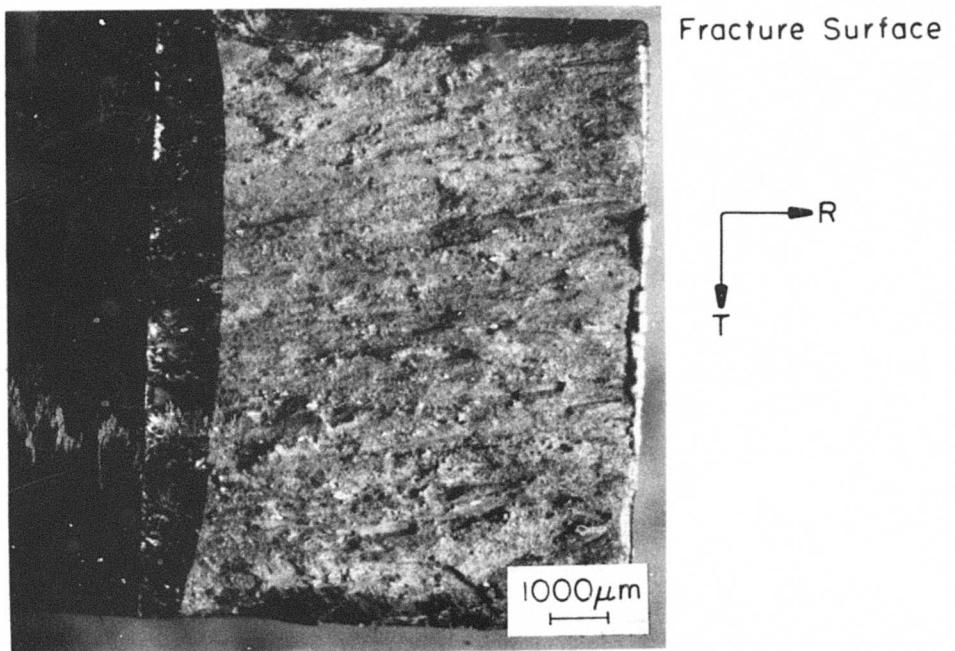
Alloy 253, sample 3WRL2. Fracture surface X8, crack path X500.
